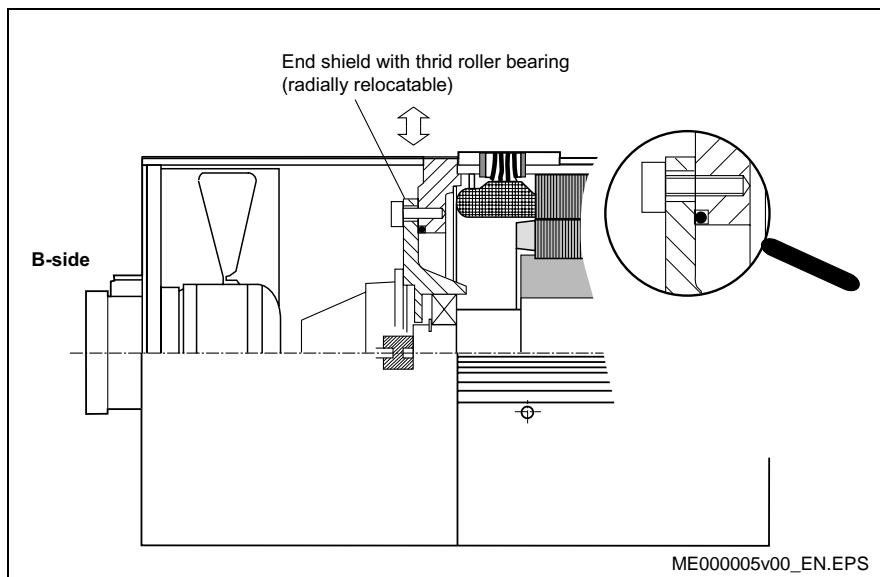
Installing an end plate with a third roller bearing to which the motor feedback system is also attached to the B-side of the motor
